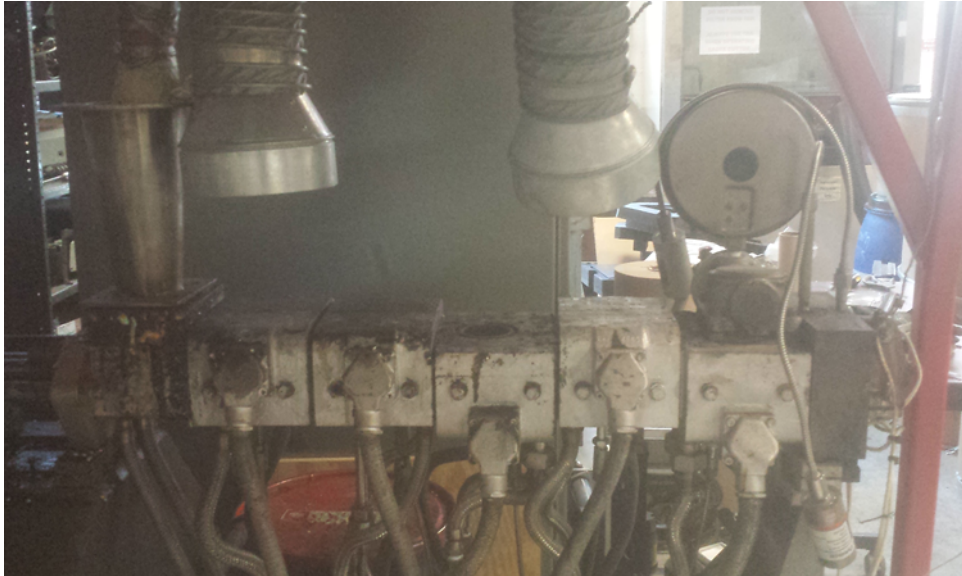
Twin screw extruder setup in the Advanced Manufacturing Lab.
